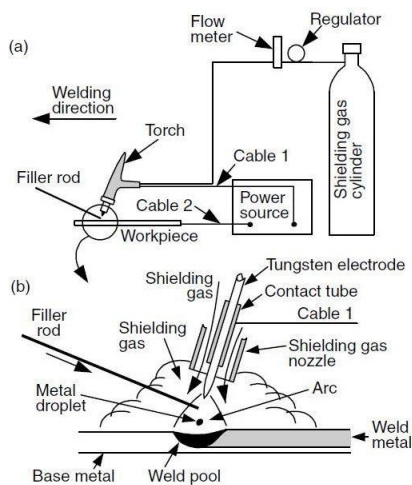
Tungsten Inert Gas Welding, (a) whole process; (b) welding area [5].
